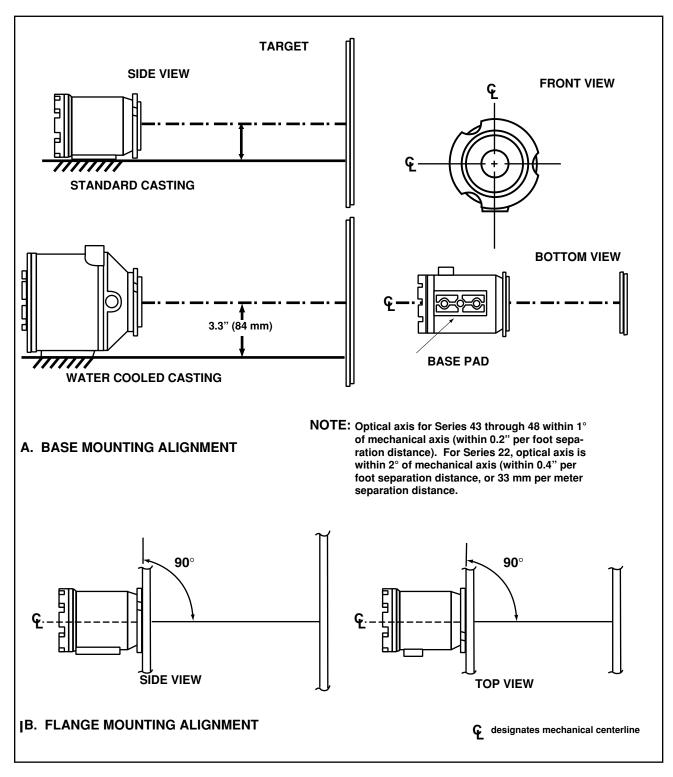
DETERMINING ALIGNMENT OF MOUNTING AXIS
